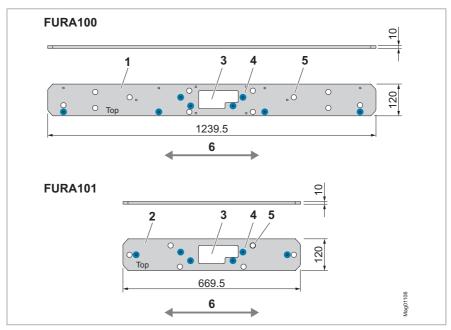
Base frames FURA100 and FURA101 (dimensions in mm)
